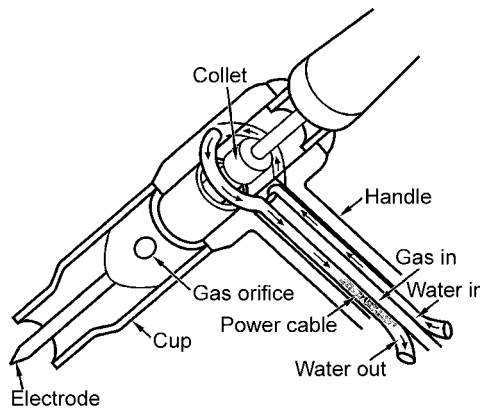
Gas tungsten arc welding water-cooled torch
